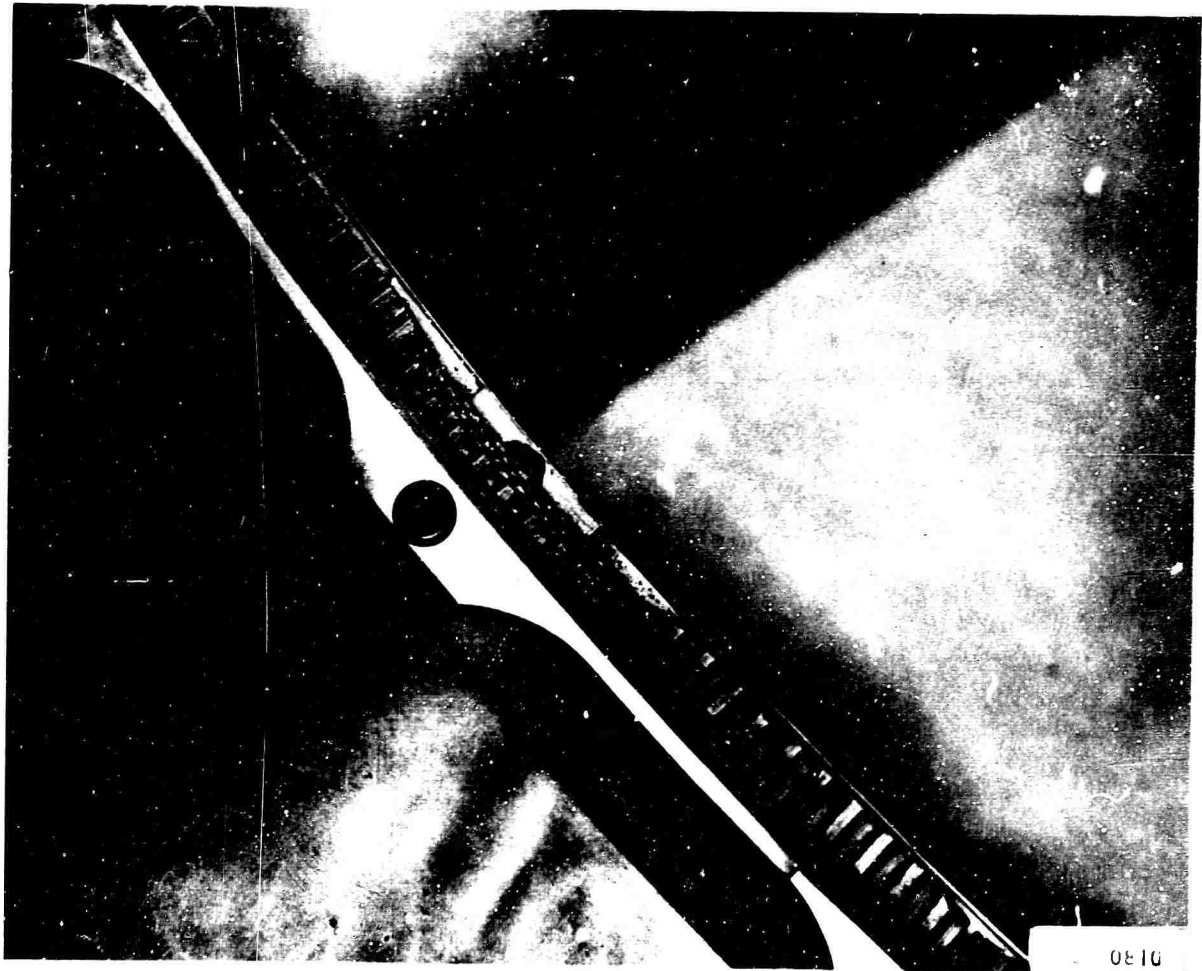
Lift Fan Forward Air Seal Inspection Opening
